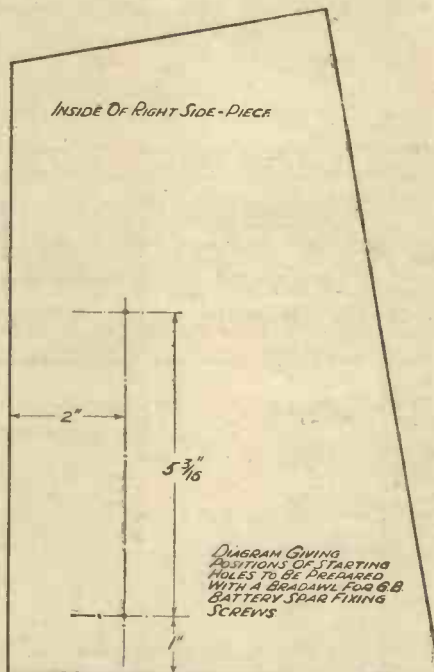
The G.B. battery clamping spar is screwed into the position shown here.
